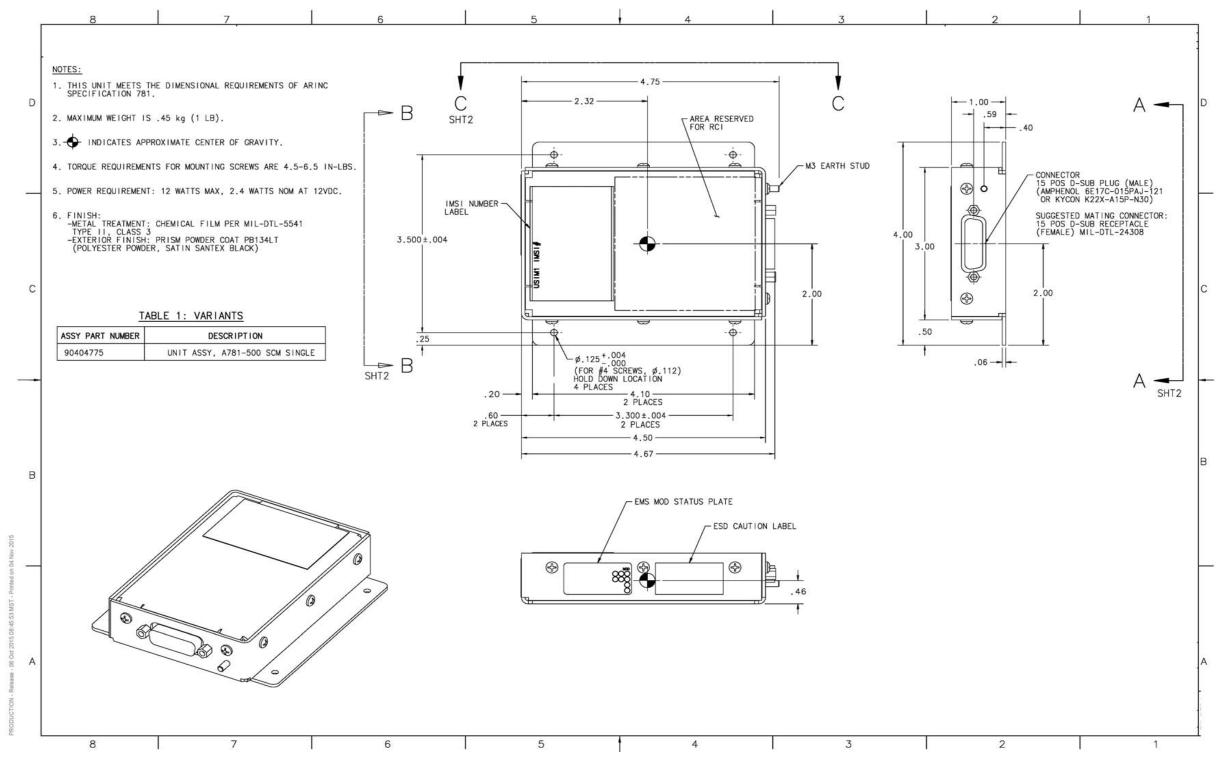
A781-500 SCM Outline and Installation Drawing, PN 90404776 (Sheet 1 of 2)
